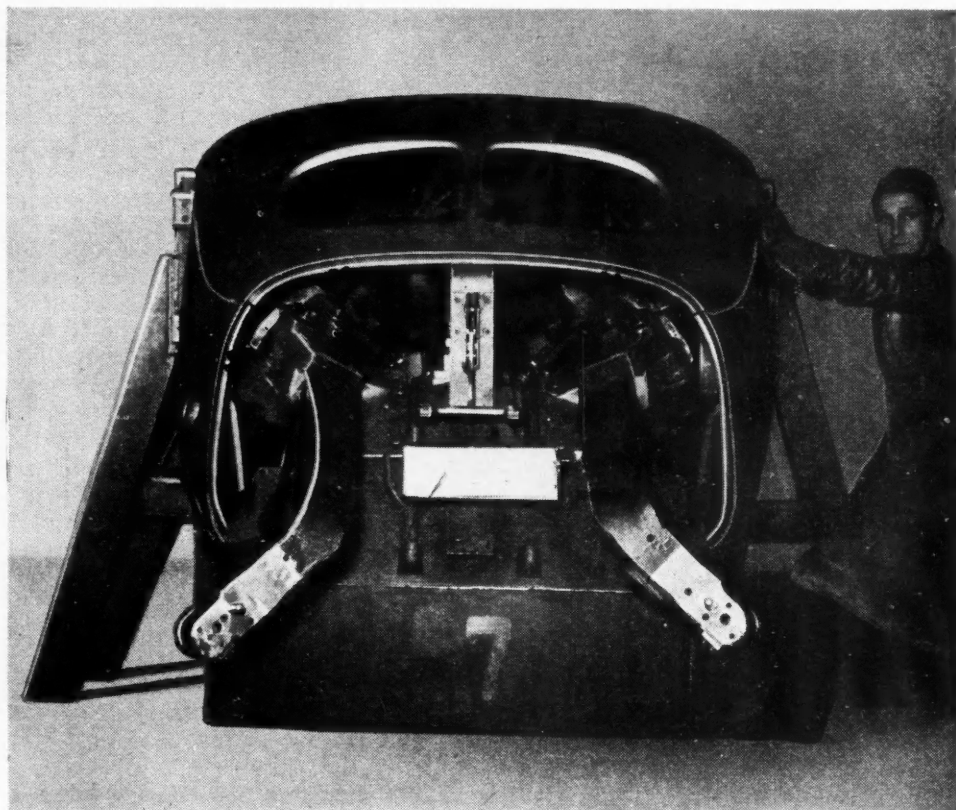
Fabricating bodies at Hudson Motor Car Co., Detroit, by a new method utilizing electric welding.
